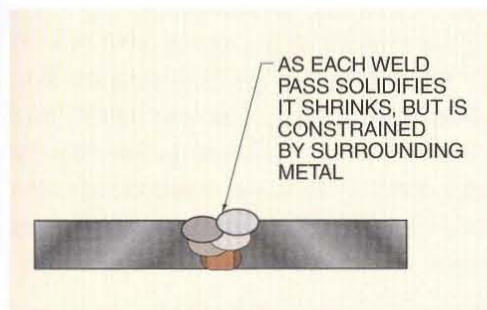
Shrinkage of the weld during solidification imposes severe stress on the weld when it is in a relatively weak condition.
